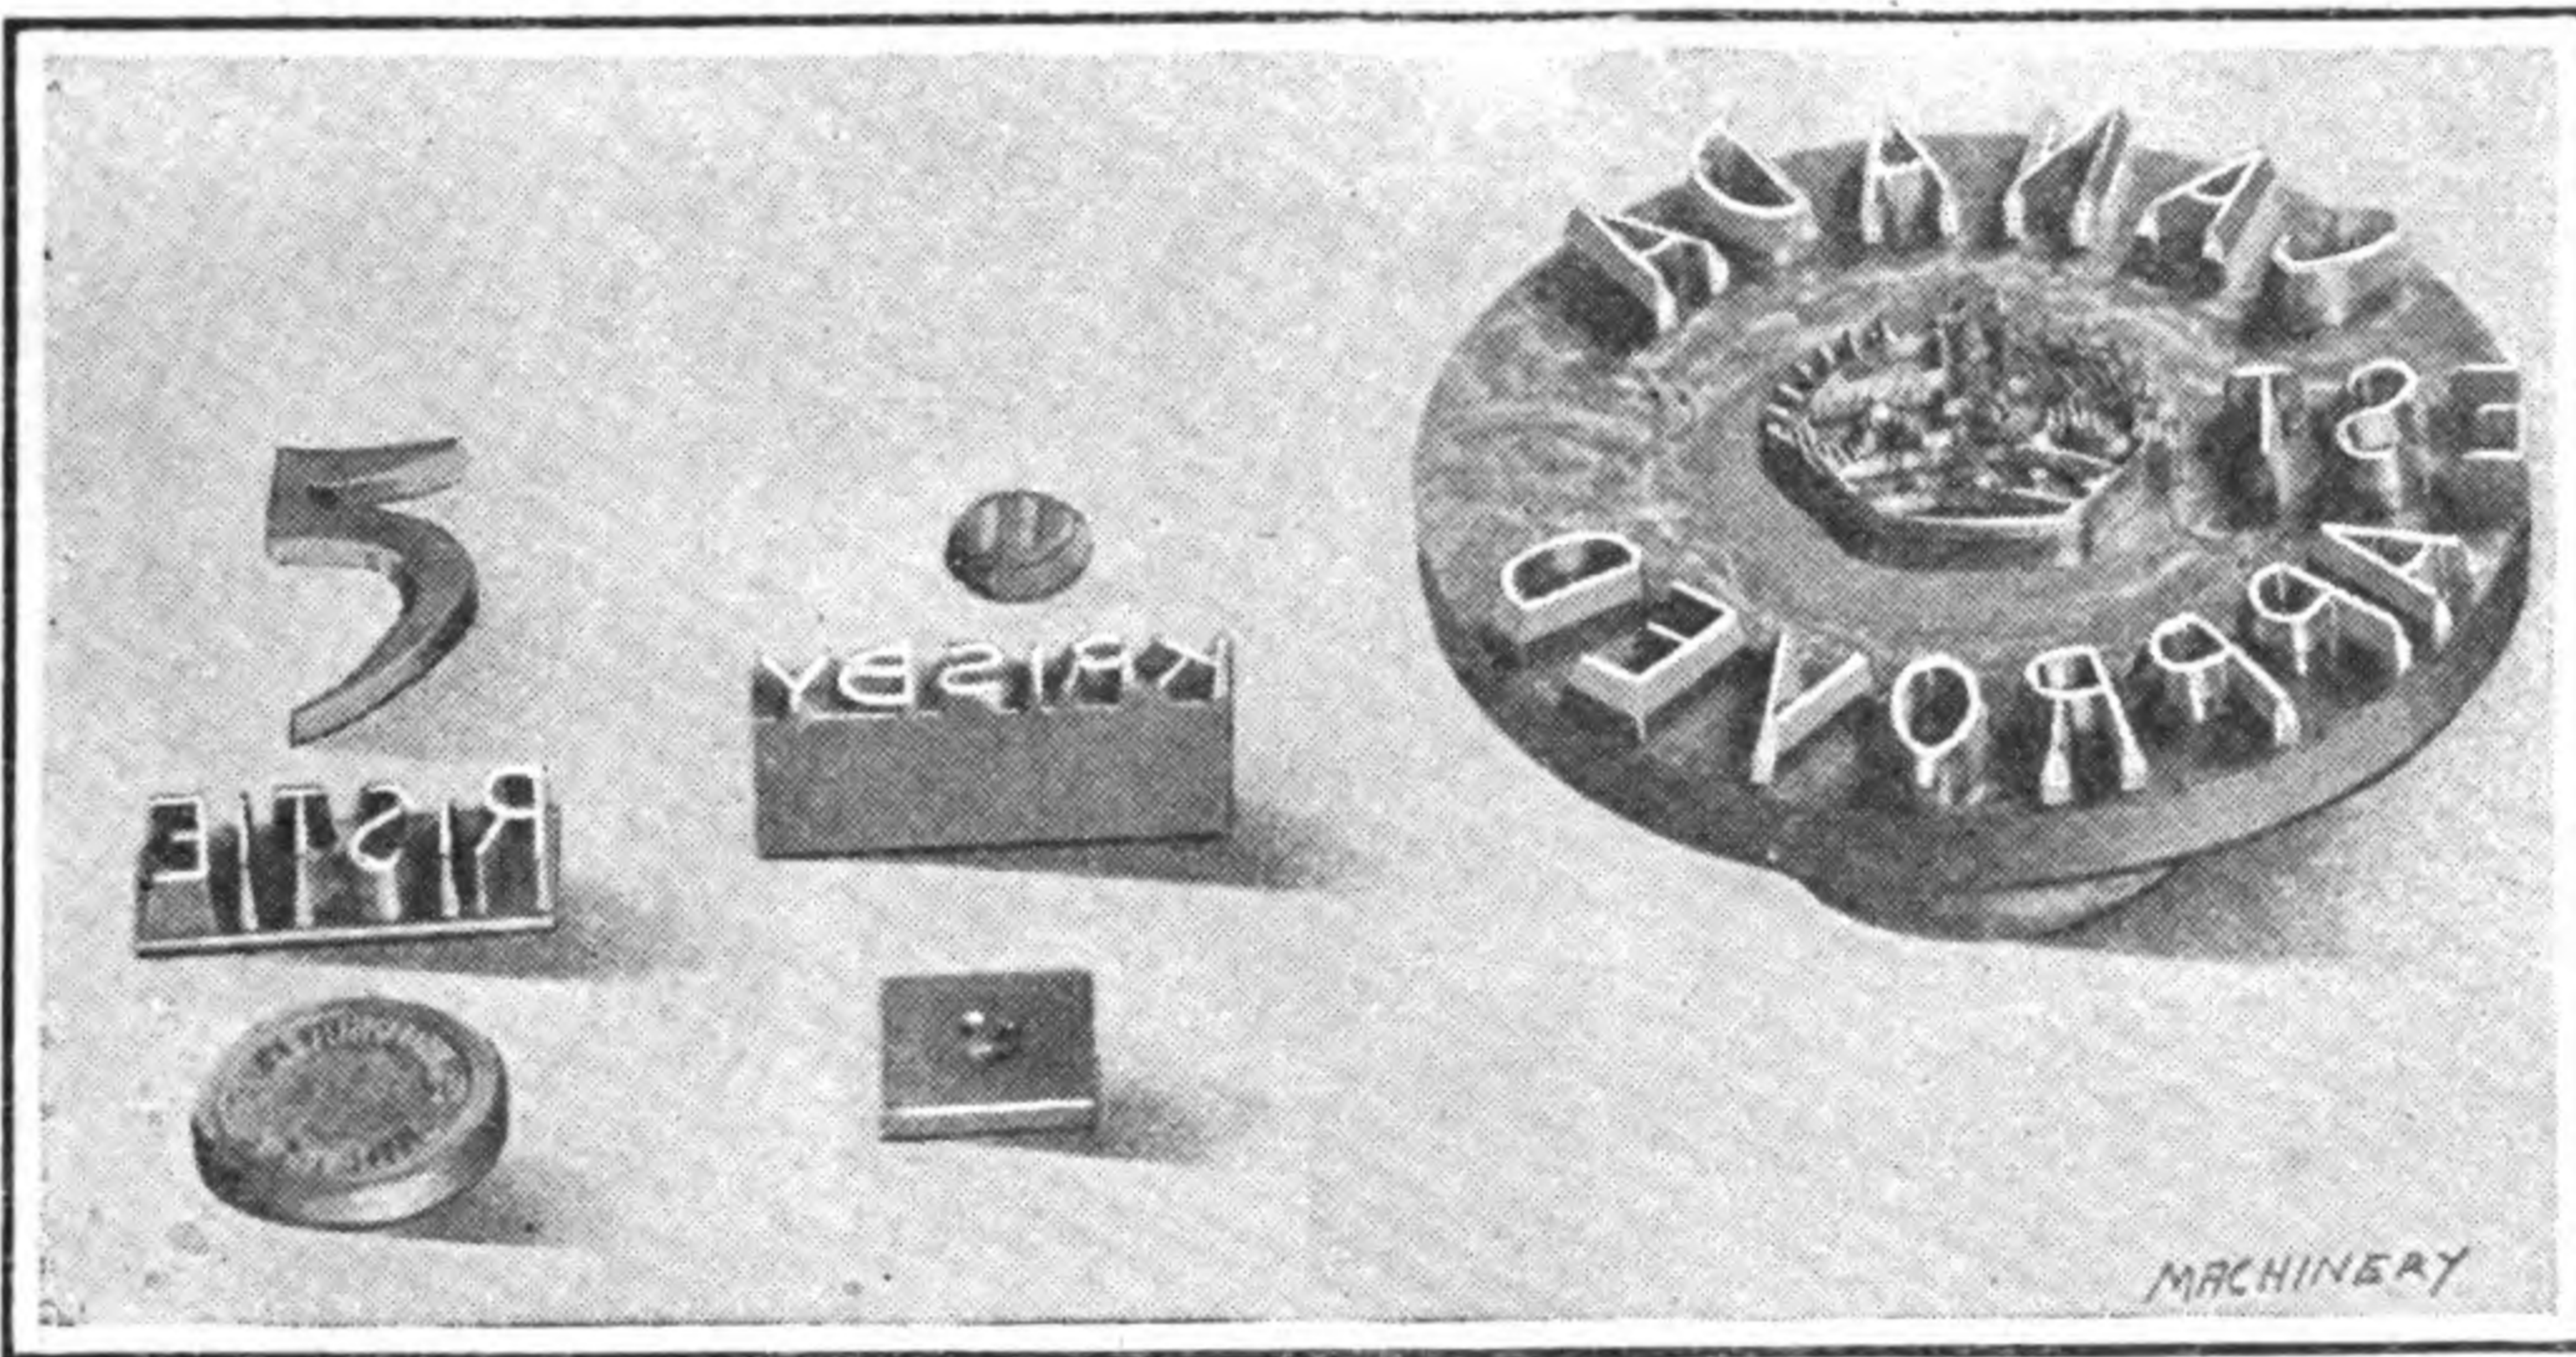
Examples of Engraving where Design is in Intaglio and in Relief, illustrating Range of Work that can be handled on Engraving Machines
